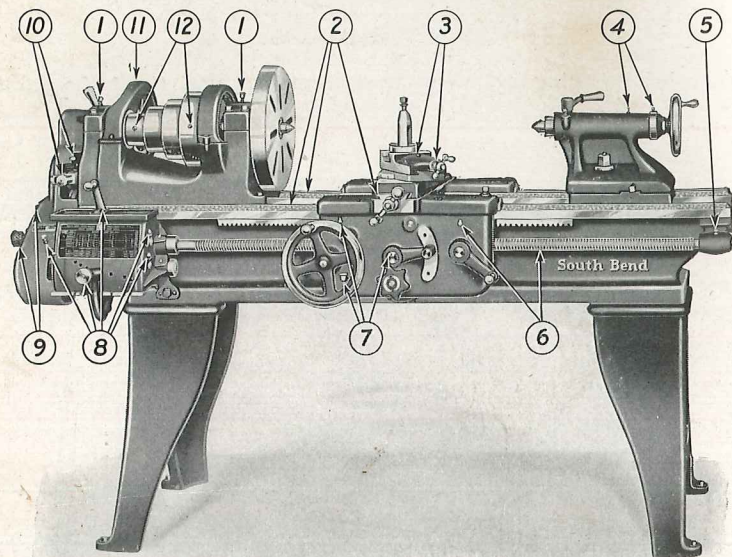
Photograph of Lathe Showing Location of Oil Holes
